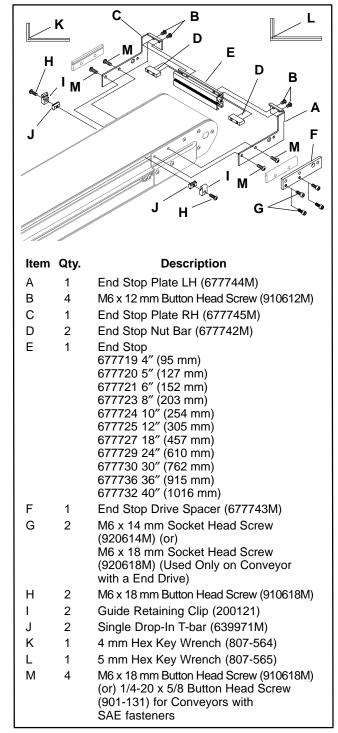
Light Duty End Stop Kit Components for 4" (95 mm) through 40" (1016 mm) Conveyors
